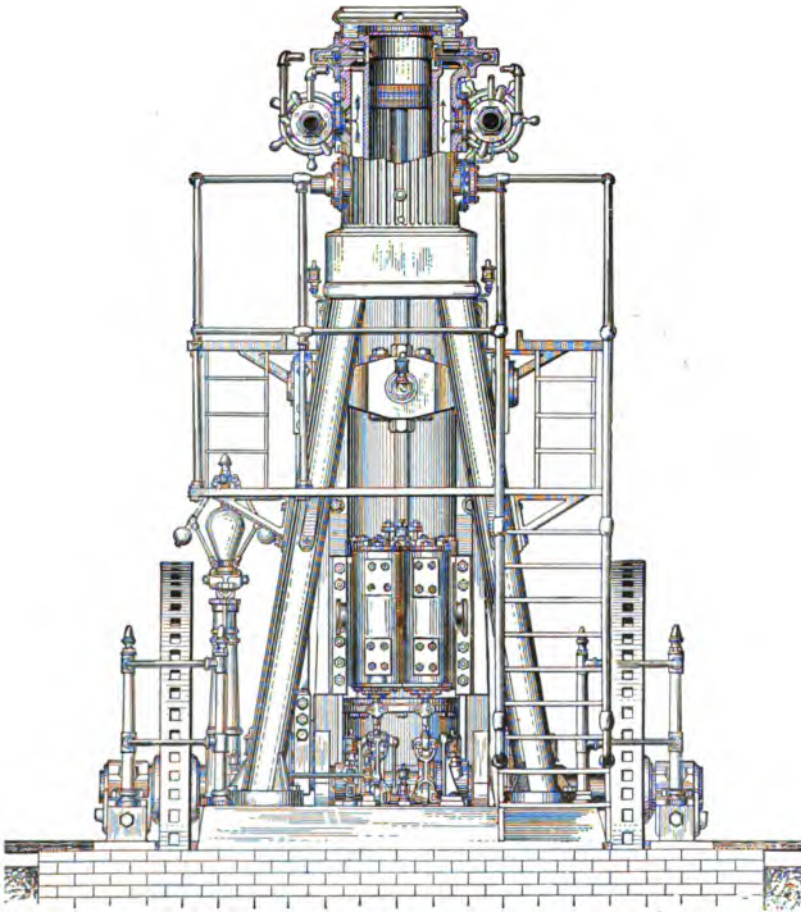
SECTION OF CASE COMPRESSOR, CASE REFRIGERATING MACHINE CO., BUFFALO, N. Y.
